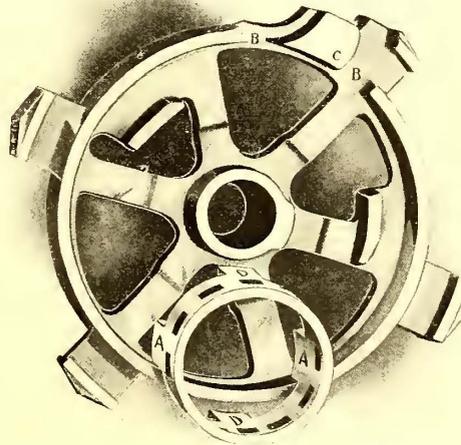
WHEEL FRAME AND ACTUATING RING
